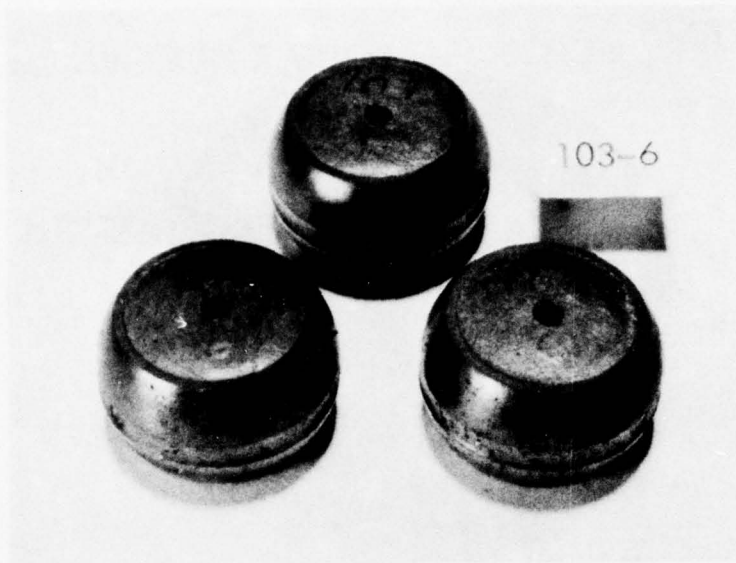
Photograph of Composite CID-103-6, Molded and Carbonized Directly in Three Metal Journal Sleeves and Ready for Machining to Specified Bore Size
